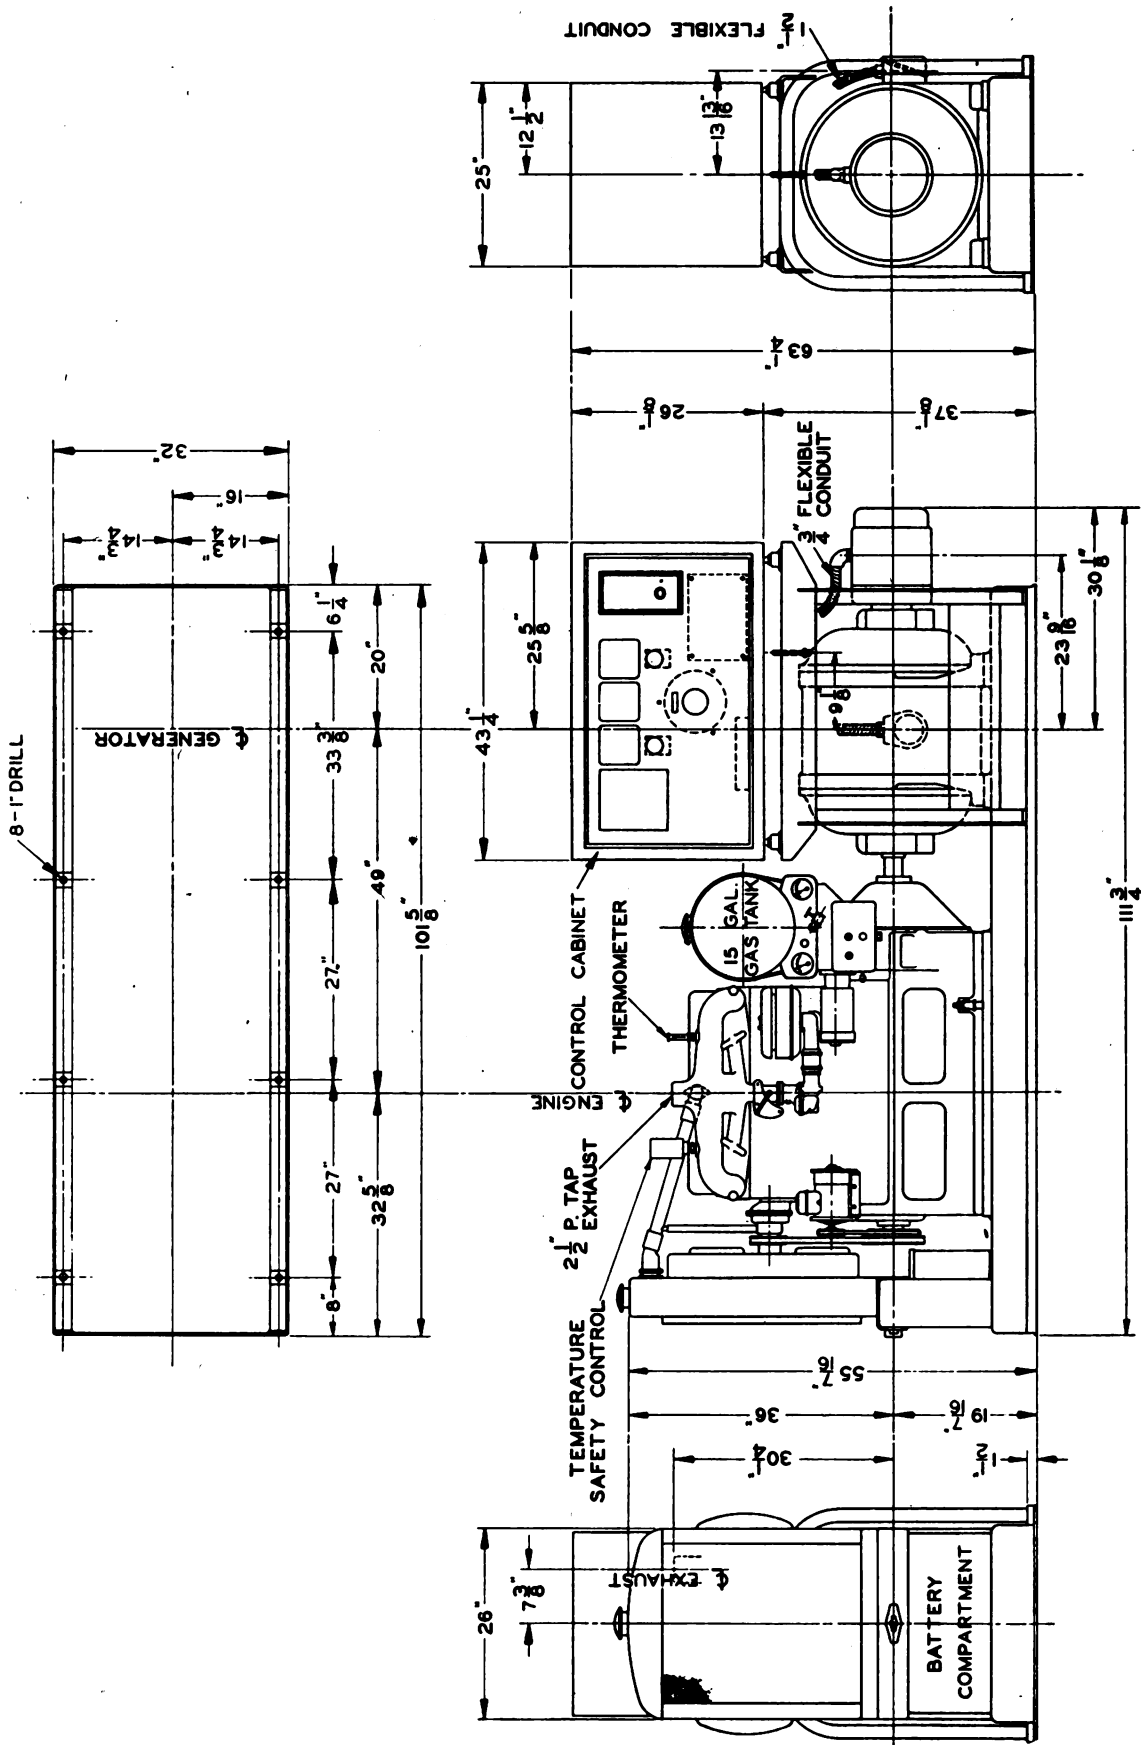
Installation and Dimensional Drawing of Power Unit (All Except Serial Nos. 181832 to 181955)
